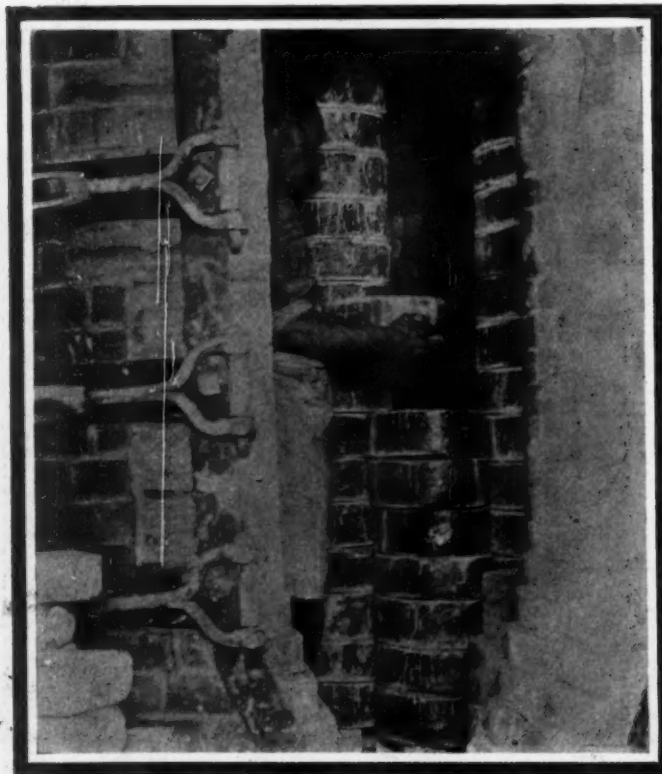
Showing the seagulls being placed in a kiln preparatory to being burned.
